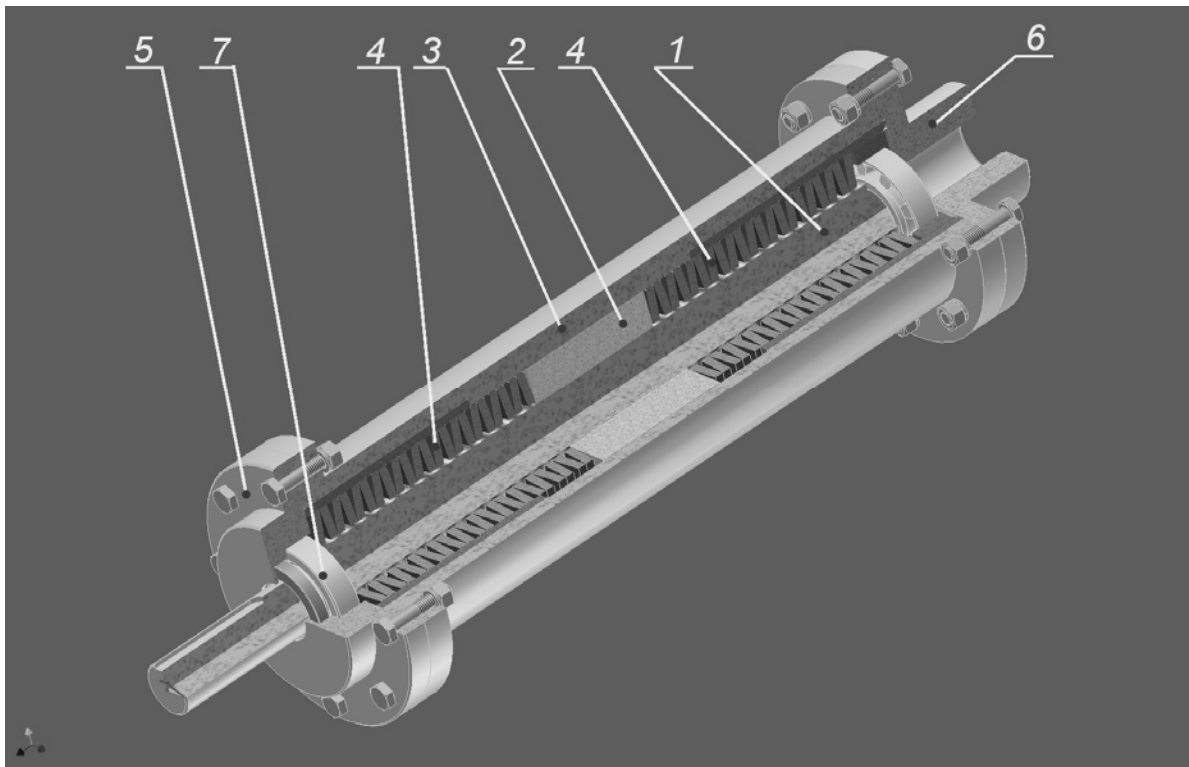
Two-way- flexible torsional metal coupling prototype construction. 1 – screw-threaded coupling shaft, 2 – splined sliding sleeve with internal screw thread, 3 – housing with cut splines, 4 – disk spring set, 5 – cover plate, 6 – coupling hub, 7 – cone bearings
